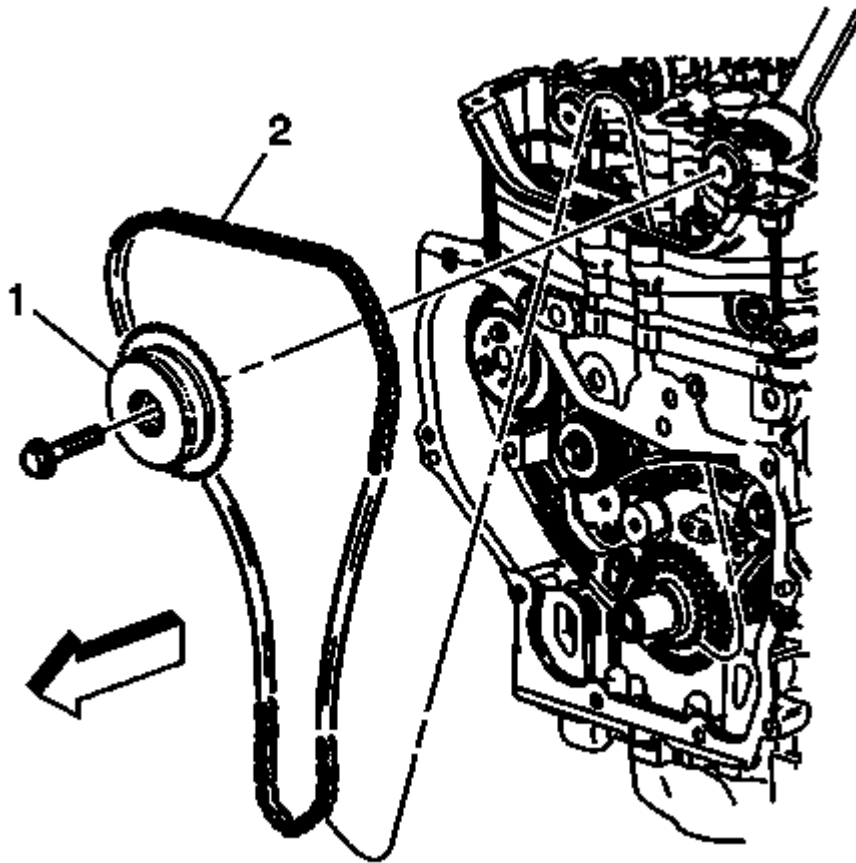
Identifying Intake Camshaft Actuator & Timing Chain
